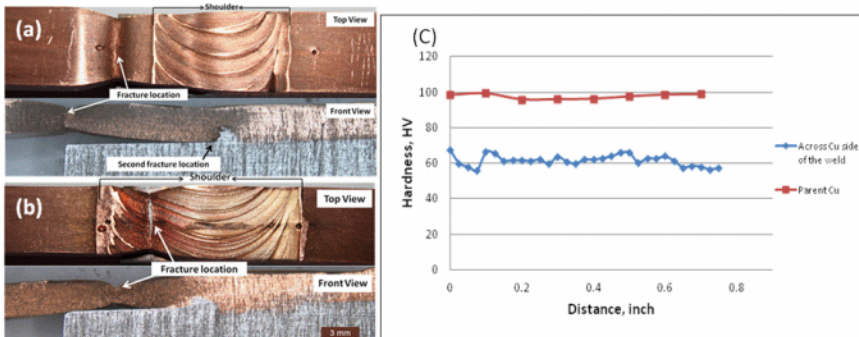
Top view and front view of the fracture parts of the welds made at 3500 lbf, 400 RPM and a) 3 IPM and b) 2 IPM and C) Hardness value across the parent copper and copper side of the weld for welds made at 3500 lbf, 400 RPM and 3 IPM.
